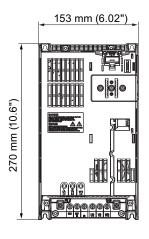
Dimensions and drill pattern for Power Module PM240, FSA, Push Through
